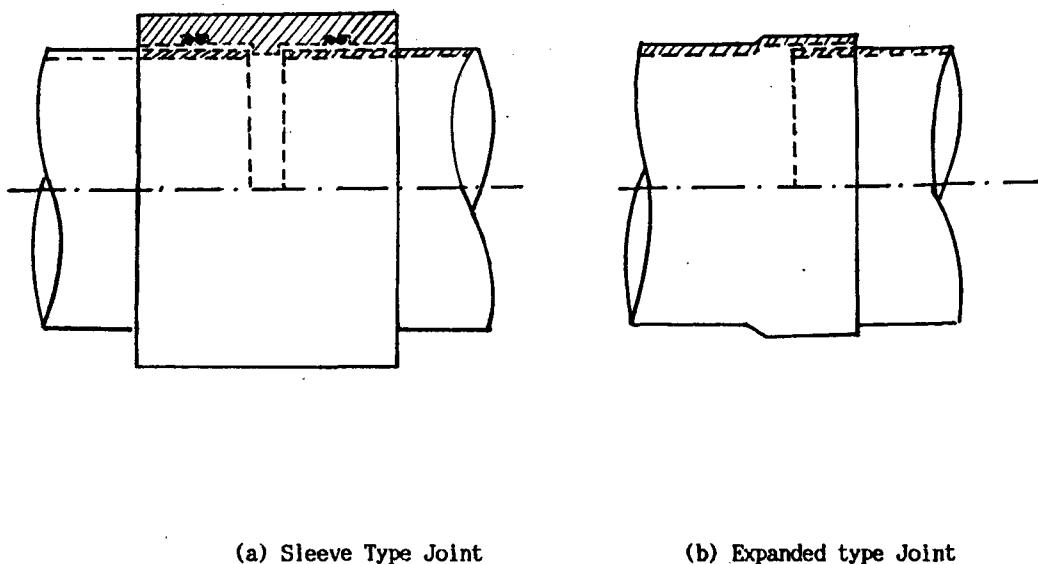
Configurations Sleeve Type Joint and Expanded Joint
